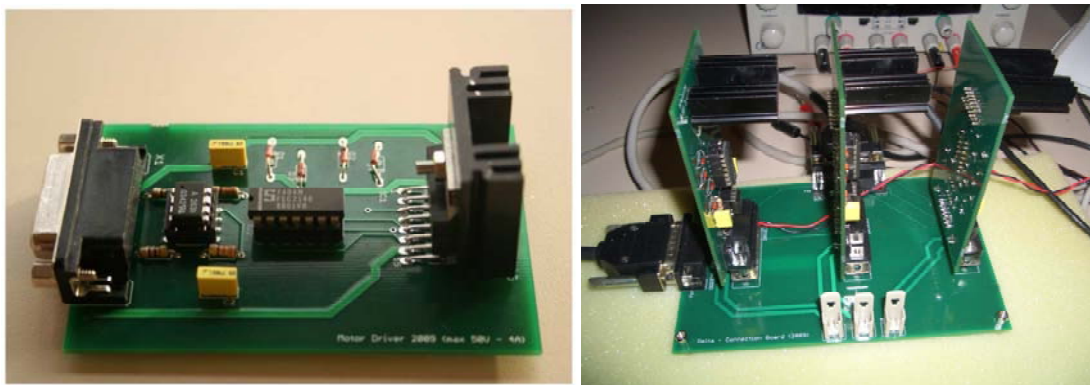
a) Driver for the Direct Drive Motors b) Connection Board
